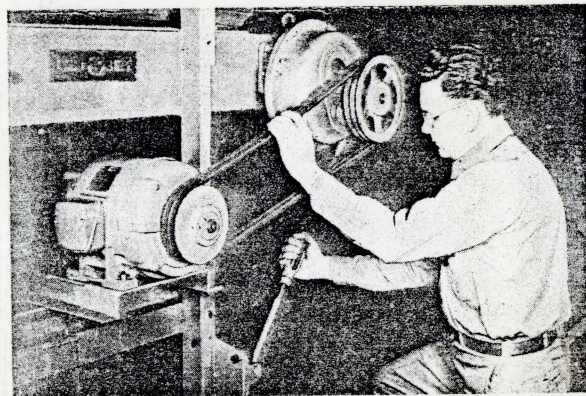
V-belt tension on FMC/Link-Belt shaft-mounted speed reducer is easy to adjust.
